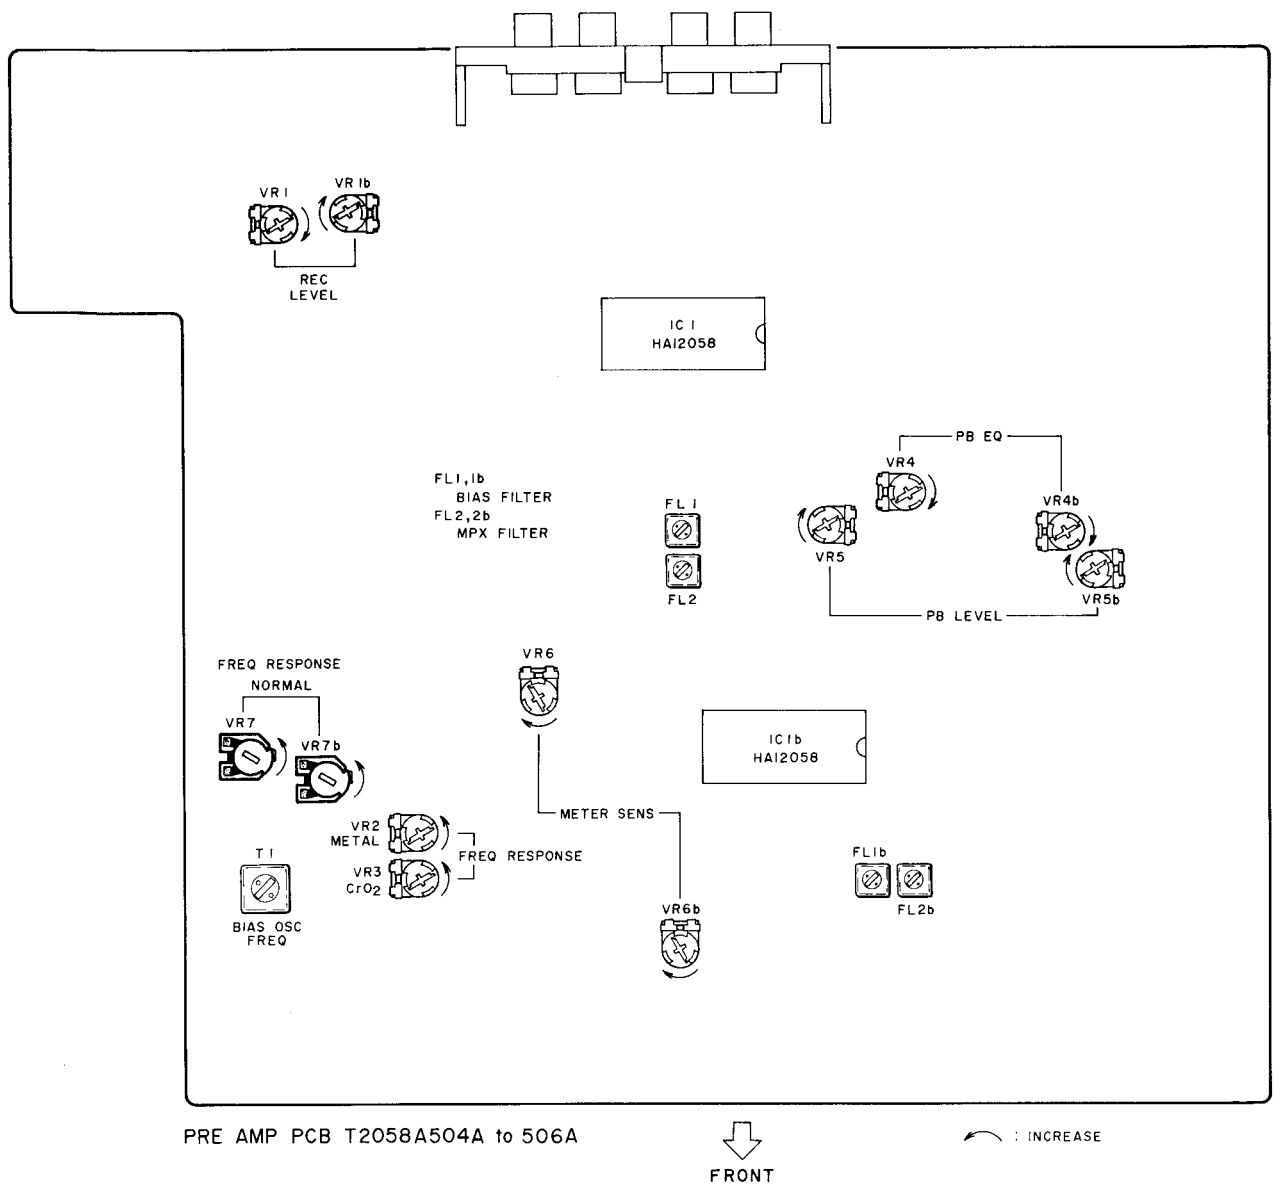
GX-R55 Pre-Amp PCB ADJ Points
